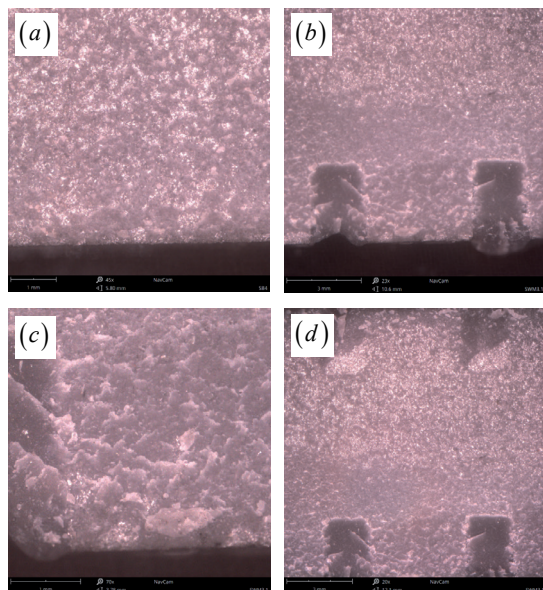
Fractography of fatigue fractures of adhesive joints that were subjected to high-cycle fatigue.
